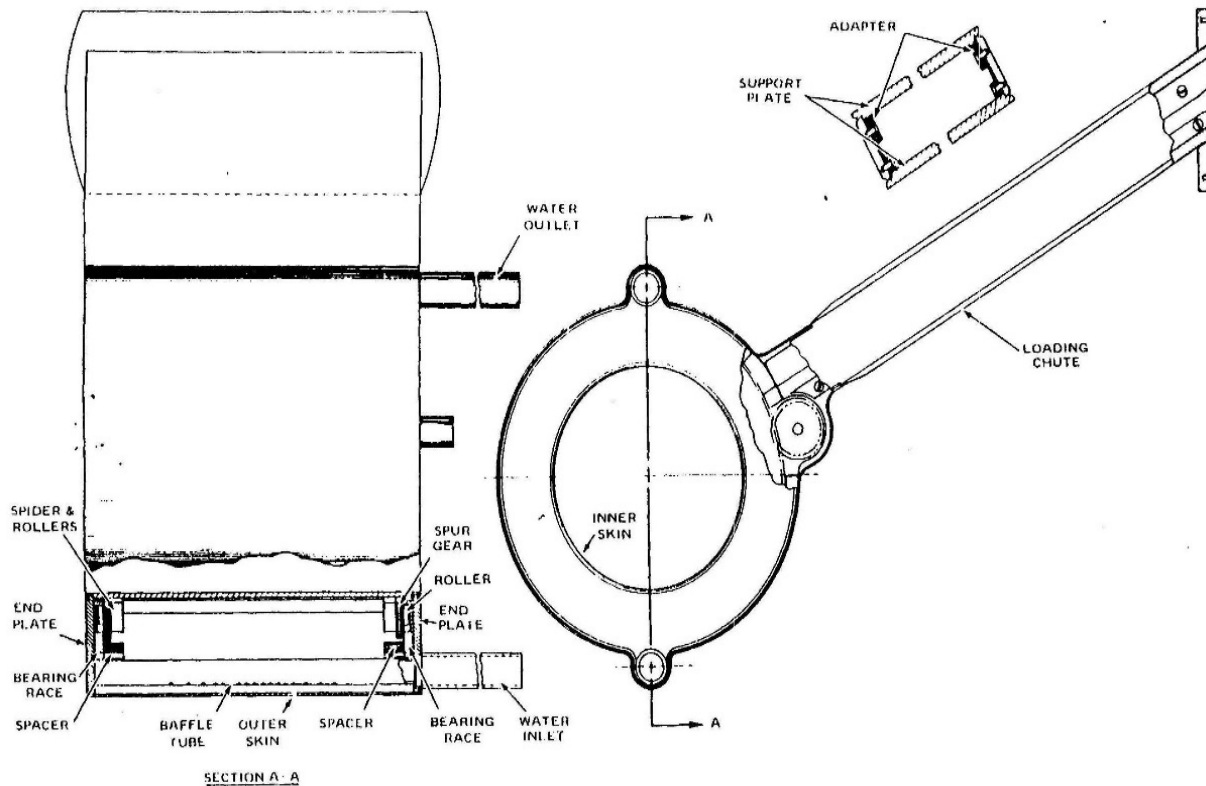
Fuel Container Assembly (SAR Figure 4-2)
